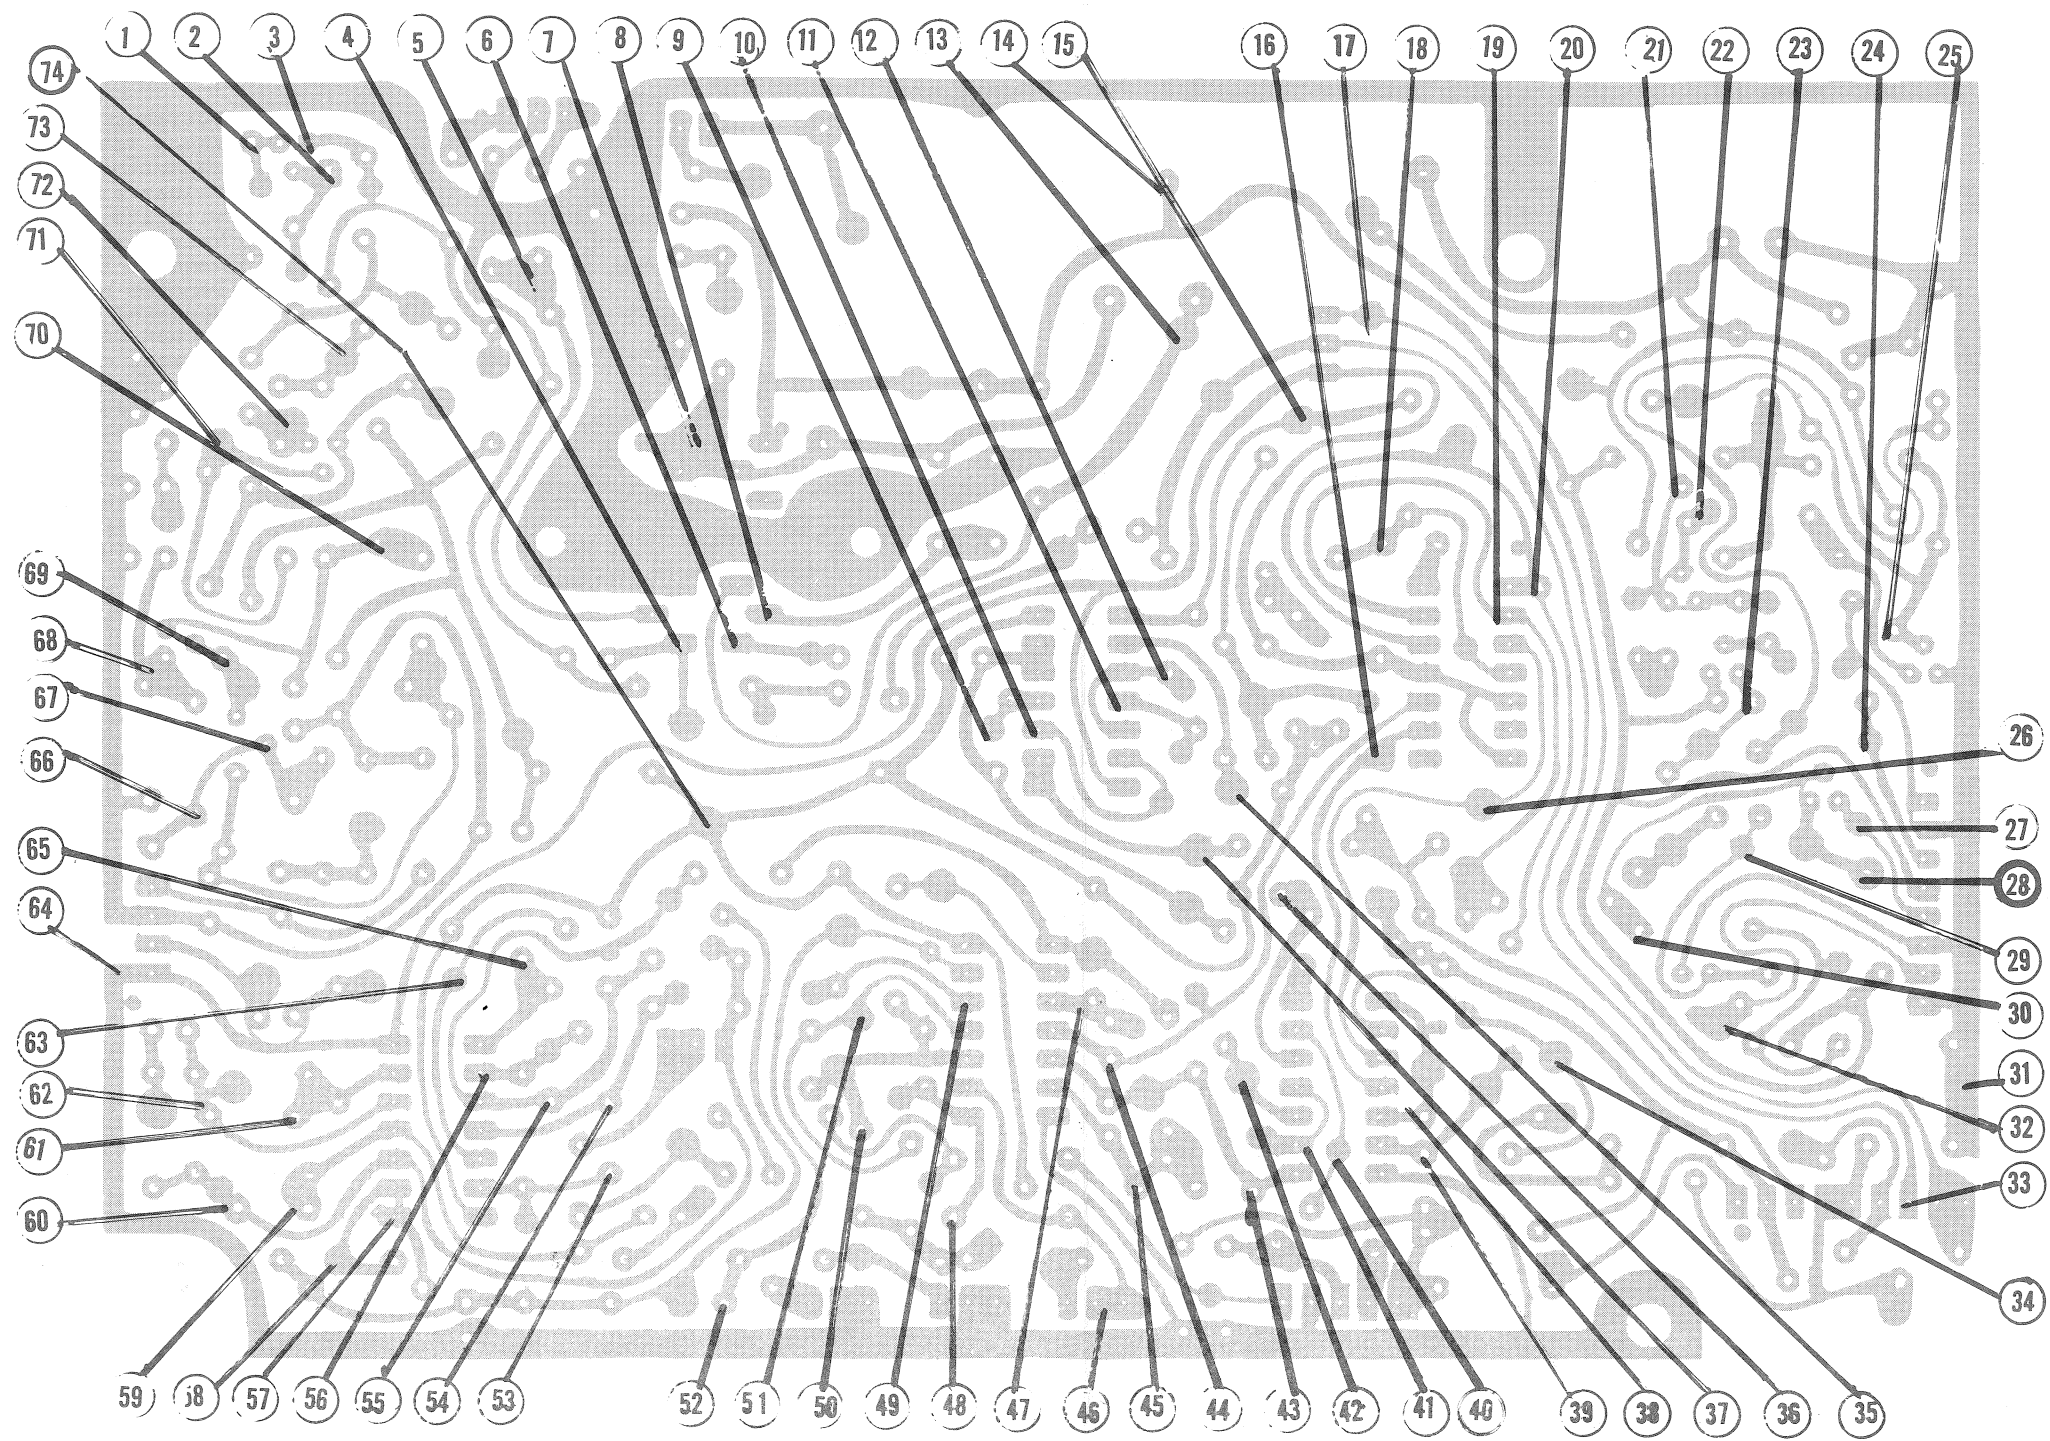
POWER SUPPLY AND AF-T BOARD ASSEMBLY (Model 3230)
